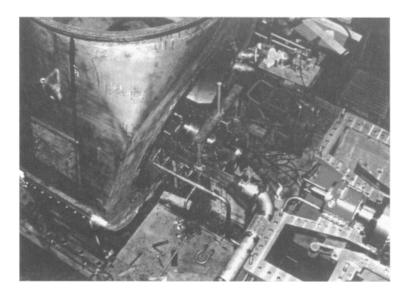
The exhaust casing is free-standing on it own wobble foot support. Axial expansion and vertical alignment are allowed by a centering key at the bottom of the casing. The casing is free-floating within the constraints of the wobble feet, bottom key, backup plate, and bellows joint. This view shows the discharge end of an axial compressor in the lower right. The expander rotor support system is pedestal-type with integral bearing housing, independent of the inlet and exhaust casings.
